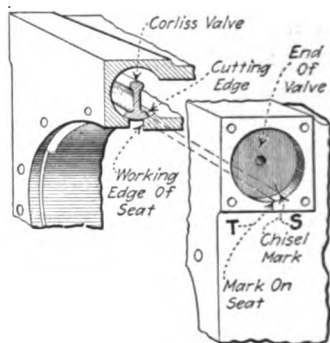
Showing marks on Corliss valve and seat whereby the relation of the cutting edges can be judged.
